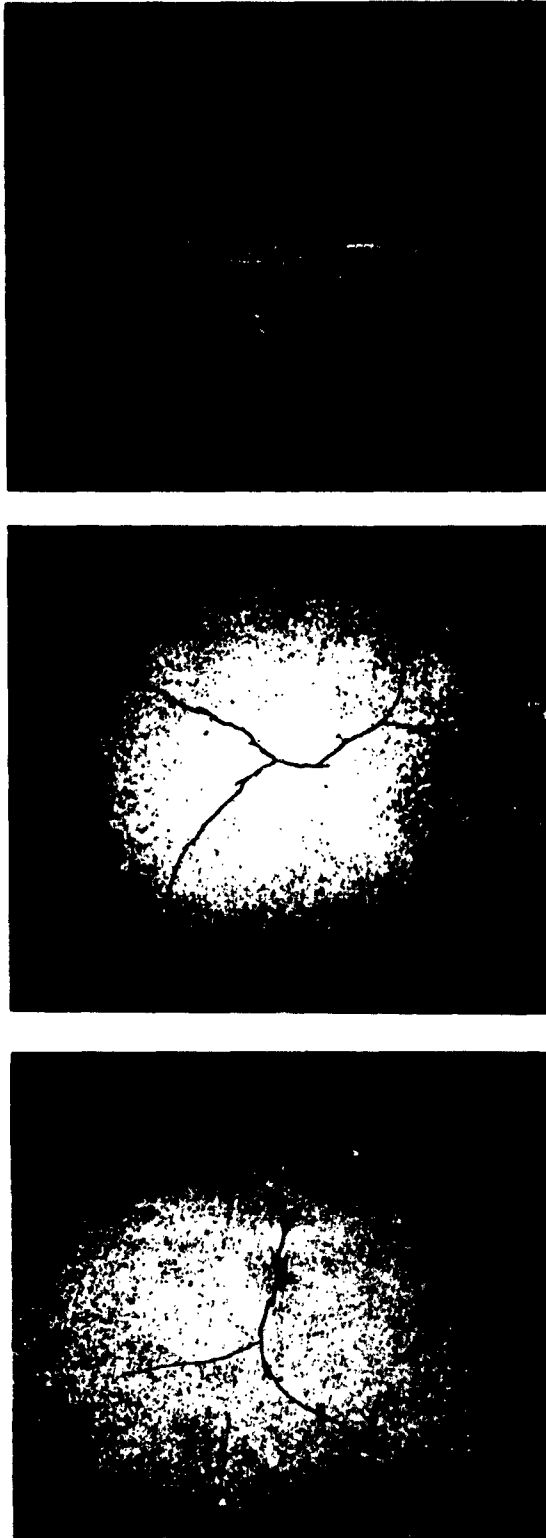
Typical examples of external cracks in beryllium resistance spot welds.
